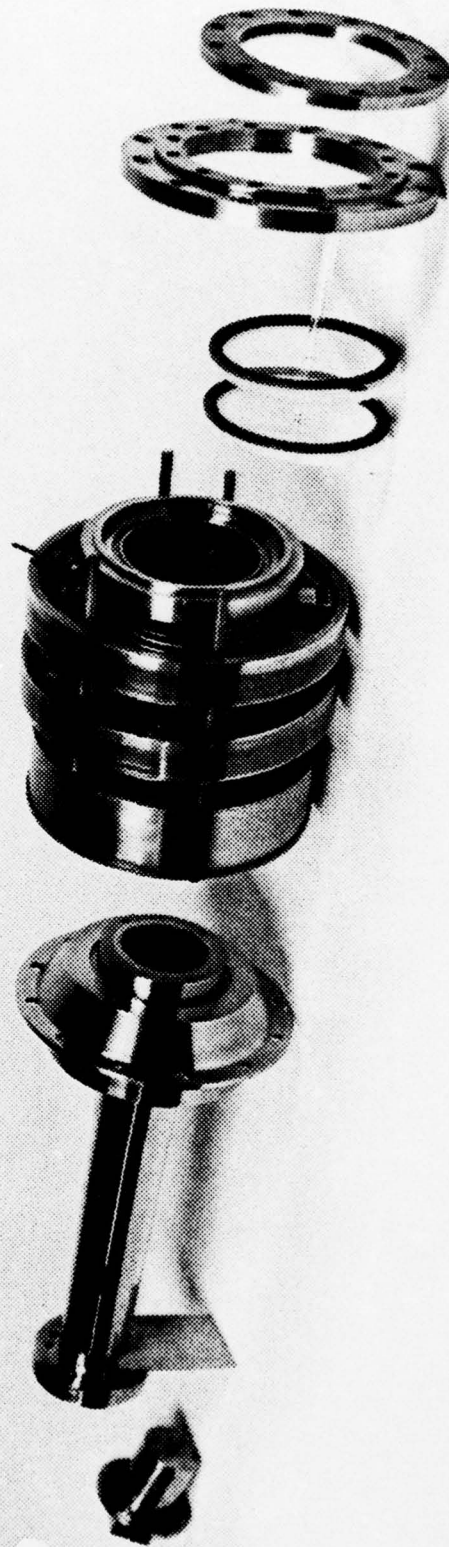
Photograph of the Rotating Heat Pipe (with Glass Fill Tube instead of Copper Tube Actually Used)
